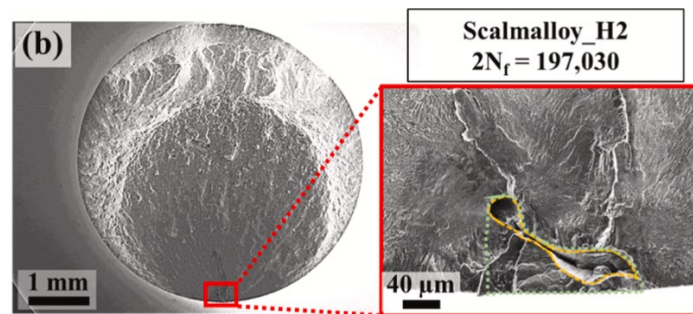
Fracture surface of the Scalmalloy of the second study [27]
